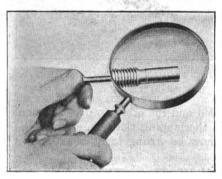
MAGNIFIED VIEW OF SCREW THREAD
